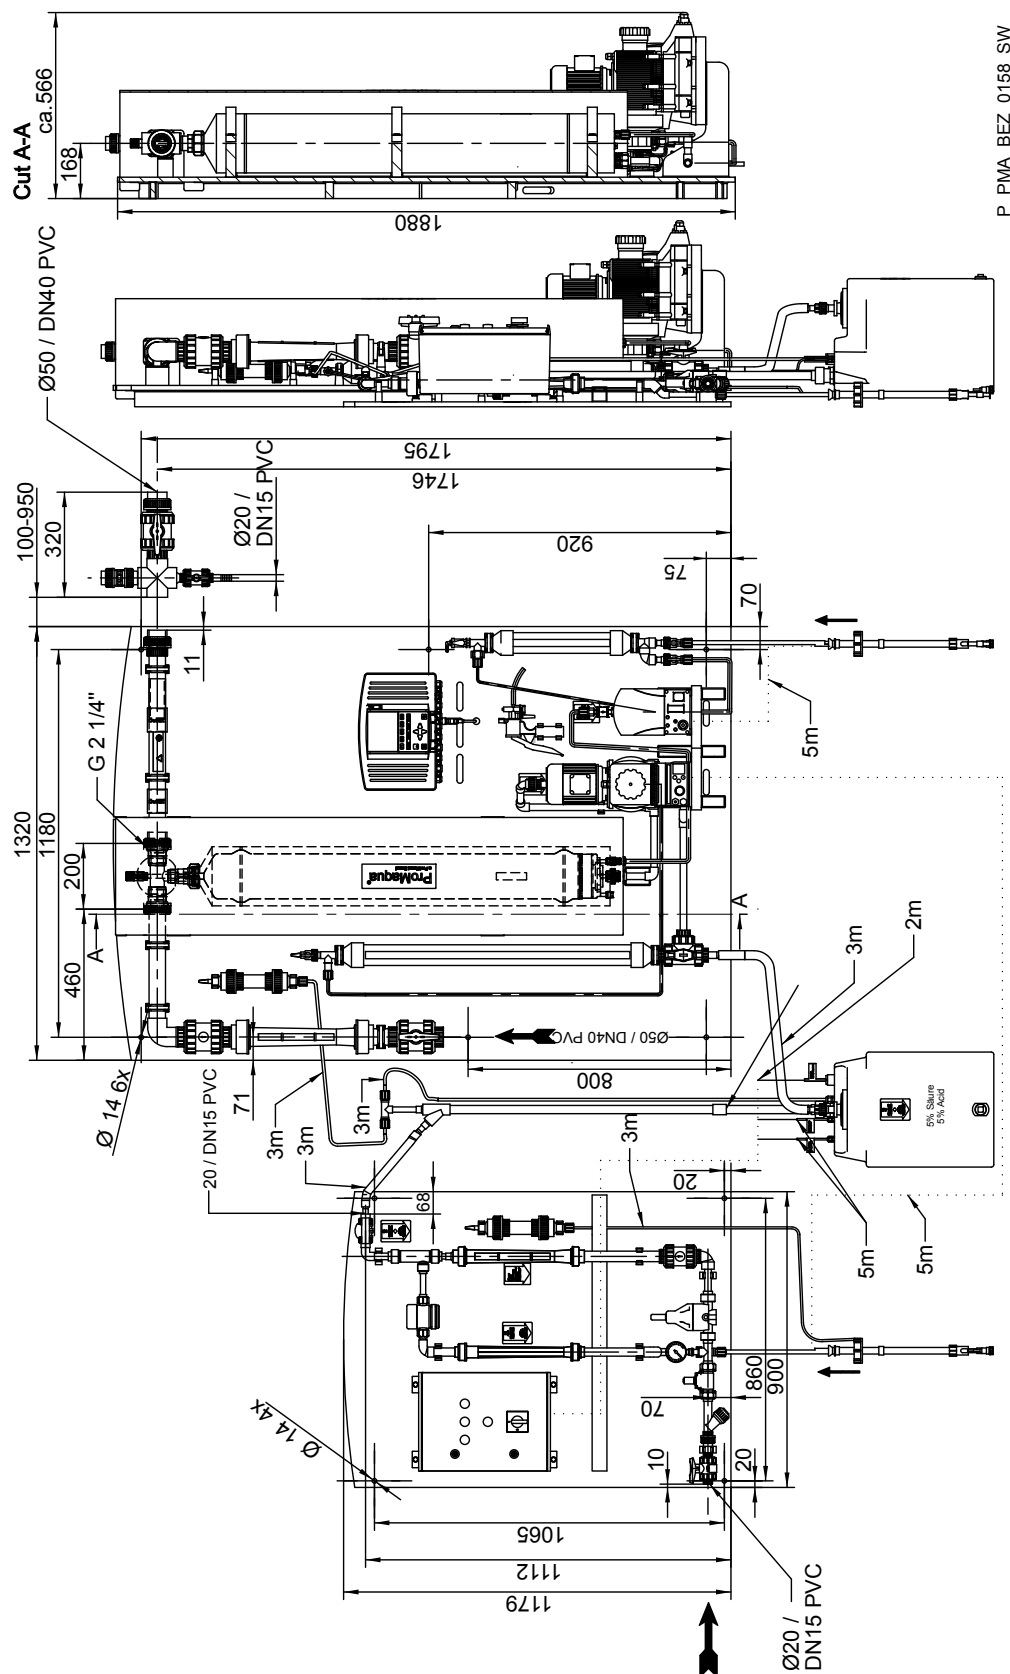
Dimension sheet CDKc 2000 ... 2800 - dimensions in mm
